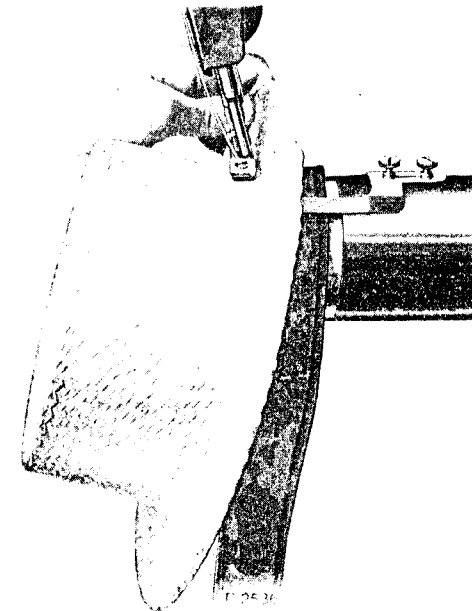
HAT PLACED INTO THE MACHINE READY FOR SEWING
